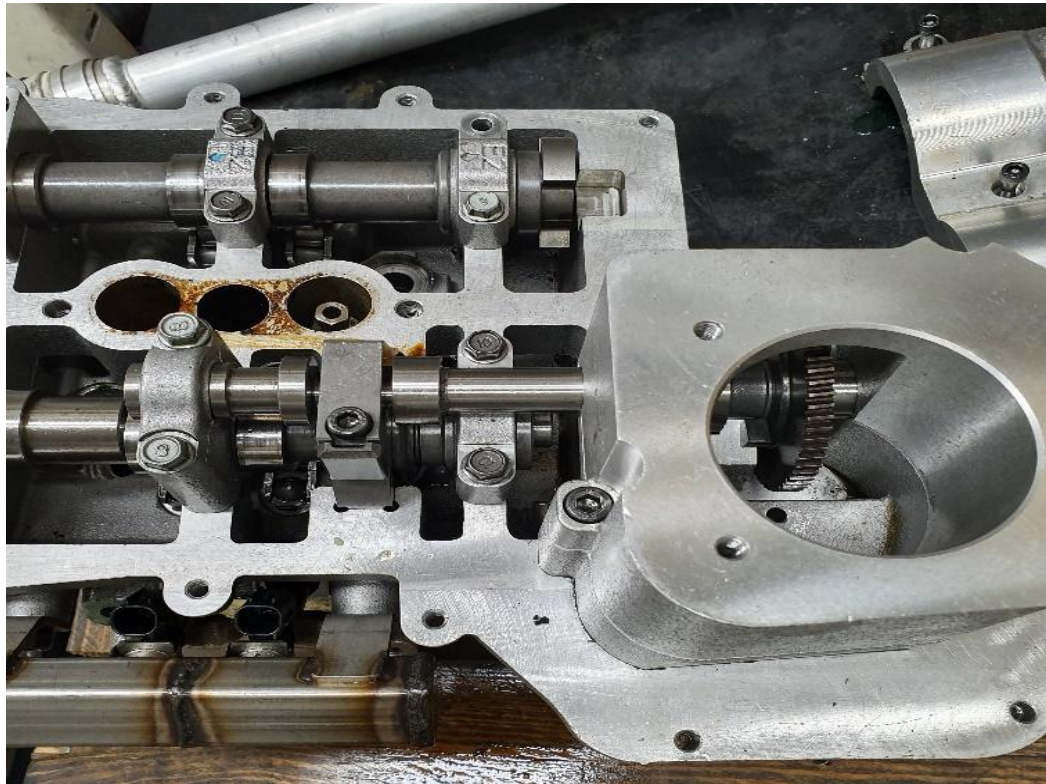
CVVD installation on dual-fuel single cylinder engine
